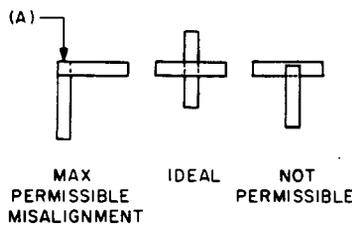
Alignment of Standard Bar-Type Contacts — Plan View of Contact Surfaces
